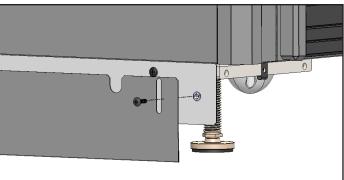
Align the side kickplate with the rivnuts in the kickplate support.
